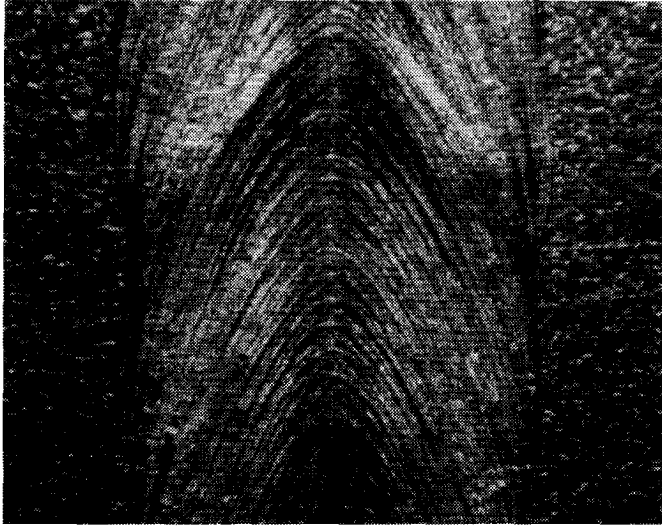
Photograph of the back side surface of the weld bead produced under pulsed arc current conditions (12.5 x).
